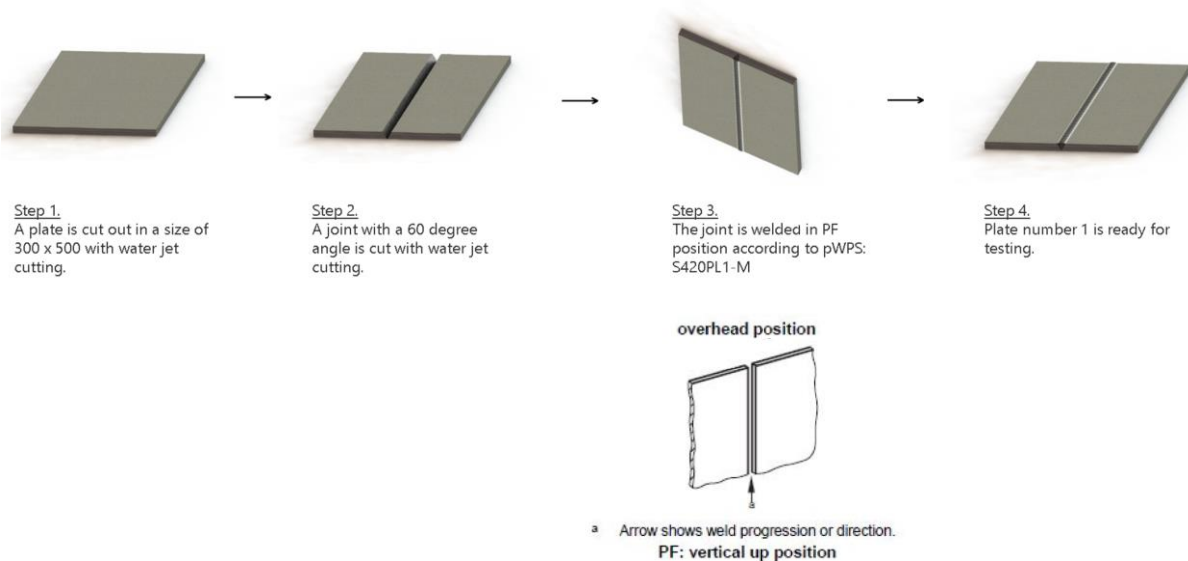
Production flow of Welding Procedure Test
